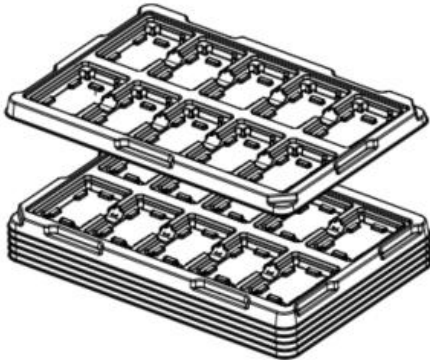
Vacuum-formed tray dimensional drawing (unit:mm)
